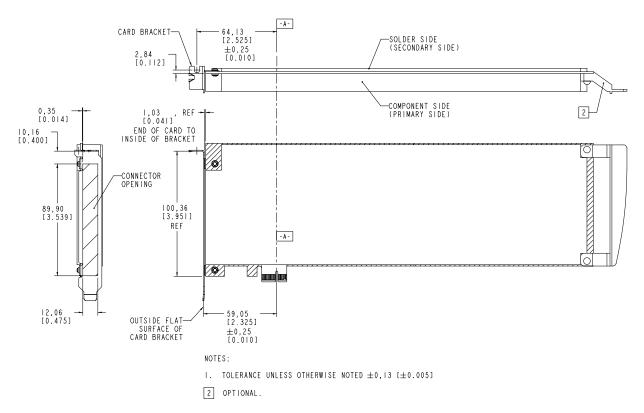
Standard Height PCI Express Add-in Card with the I/O Bracket and Card Retainer
